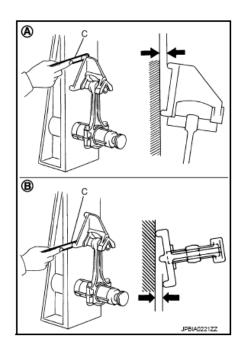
Checking Connecting Rod Aligner Courtesy of NISSAN MOTOR CO., U.S.A.
